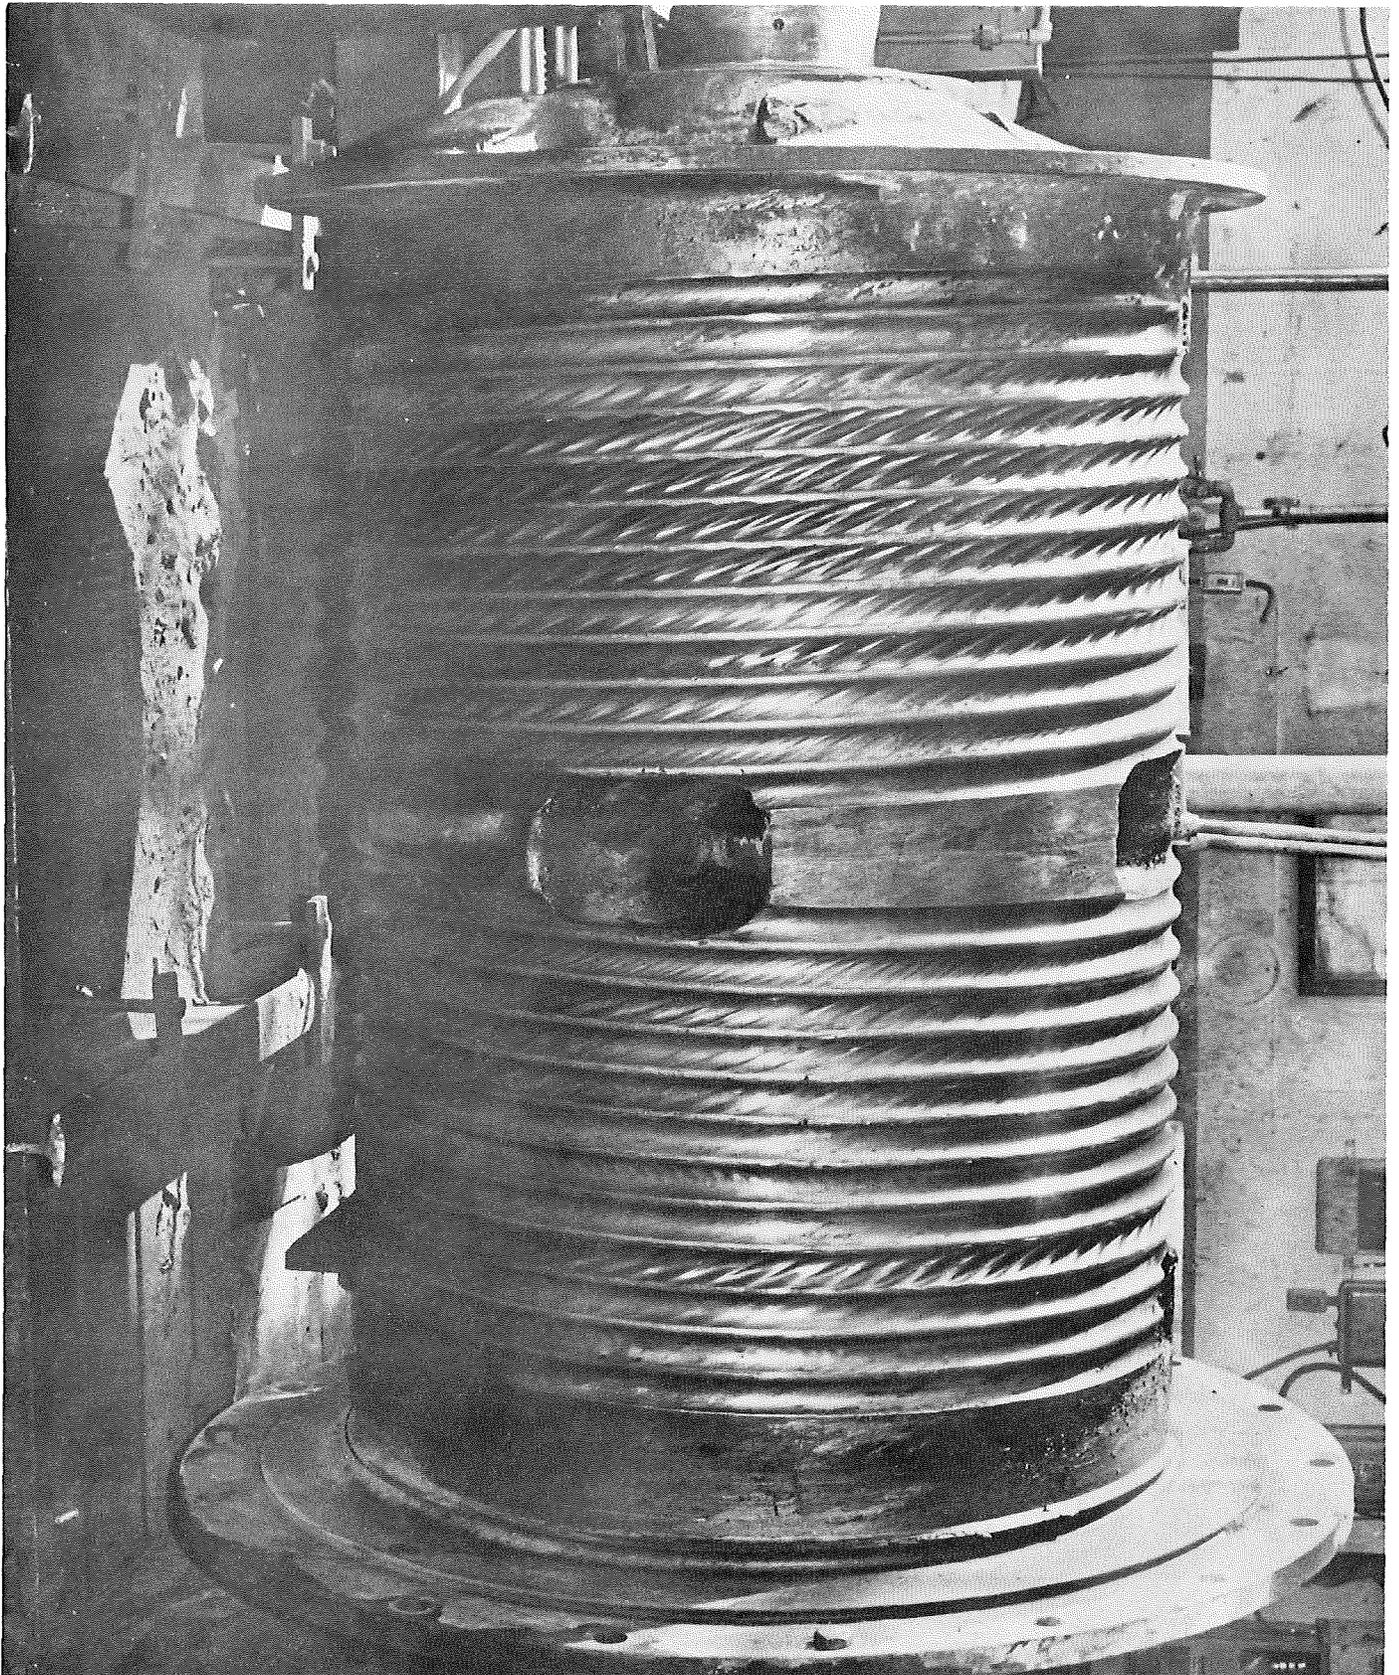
Cable wear on large spool can be repaired by weld surfacing following by a machining operation. There is a great cost saving in reclaiming large worn components of mining machinery.
